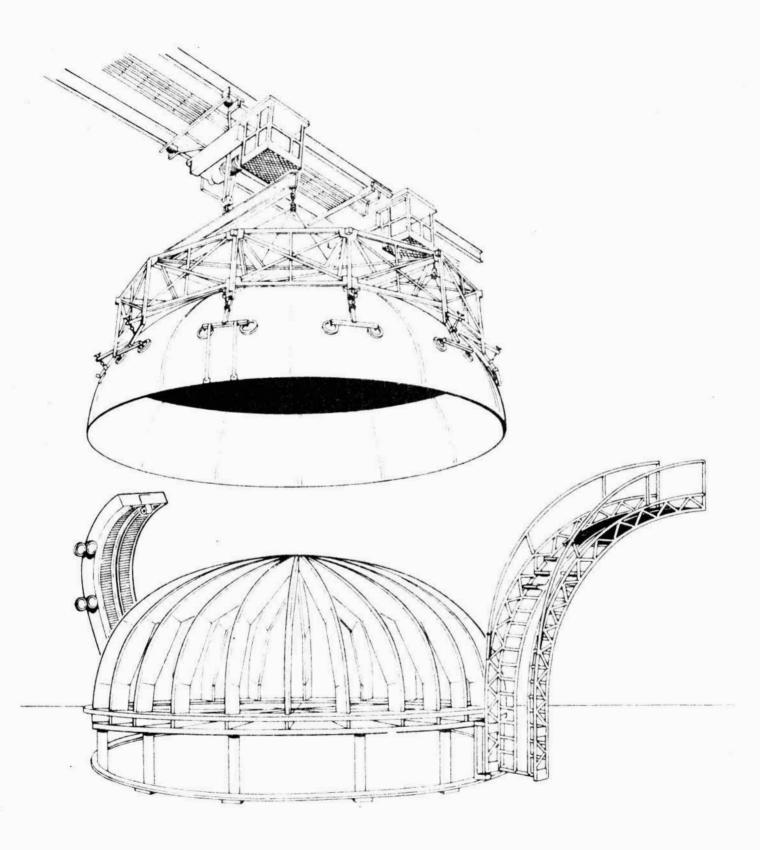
Removing Completed Bulkhead Section From Welding Fixture
